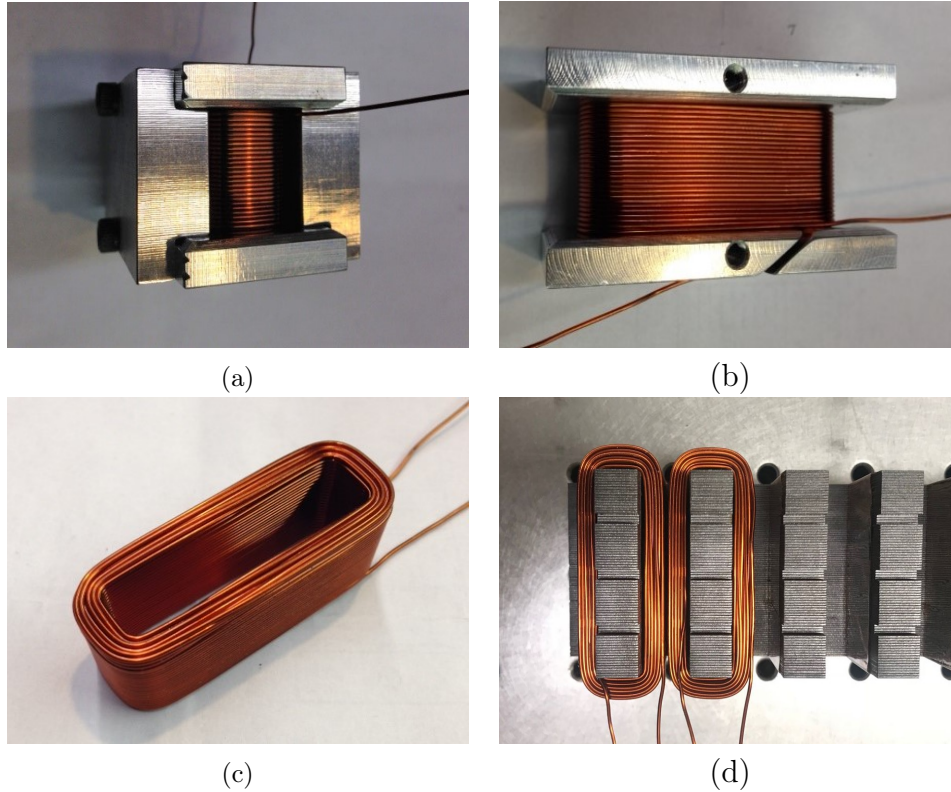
Photos of motor coil. (a) and (b): Motor coil in its winding tool courtesy of Mr. Fred Sommerhalter. (c) Photograph of one motor coil. (d) Motor coil on motor stator yoke.
